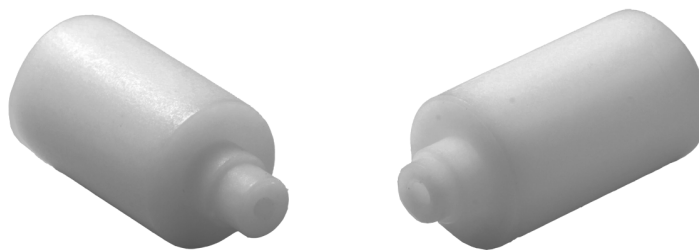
01-107M and 01-107F Soldering Fixtures
